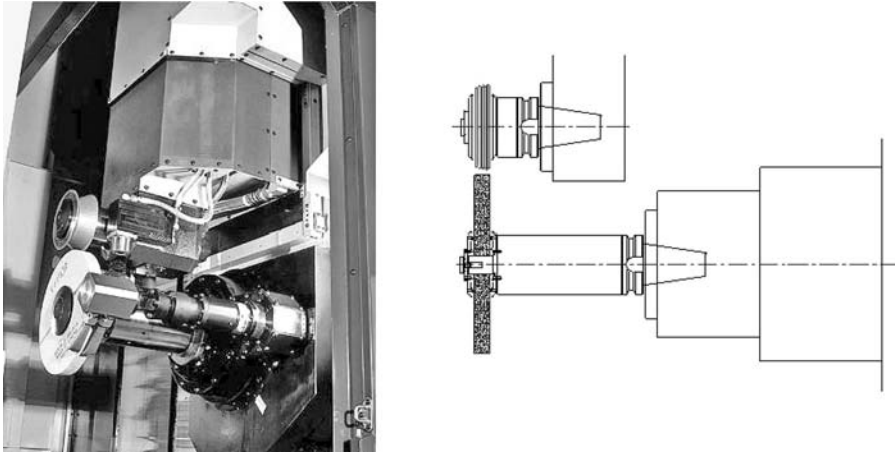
Makino machining center equipped with CDCF capability on quick-change HSK adaptors.
